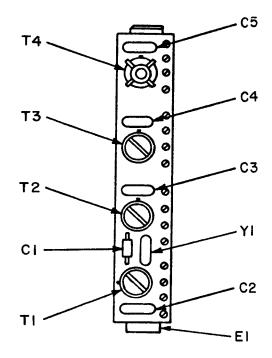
20 MHz Subassembly A2A4A10, Component Locations
